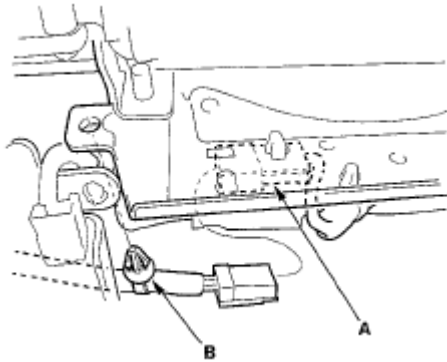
Identifying Seat Belt Buckle Switch Connector And Harness Clip
